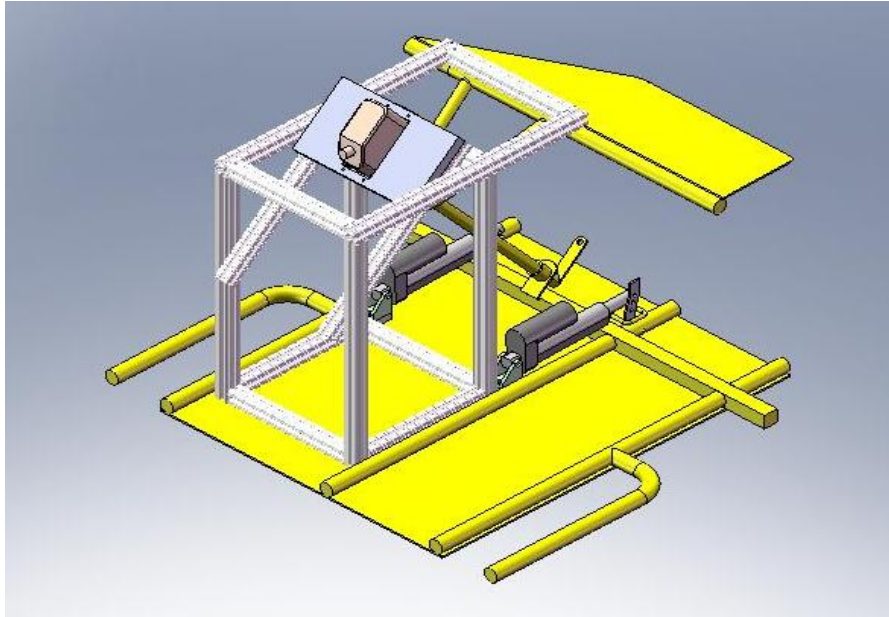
Isometric SolidWorks View of the Servo Mounting Frame
